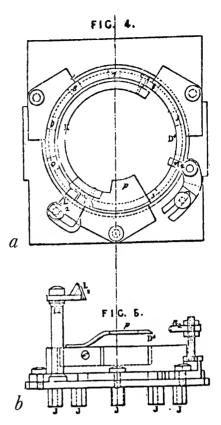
Final patent specifications, catch mechanism: a, top plan; b, side elevation.
